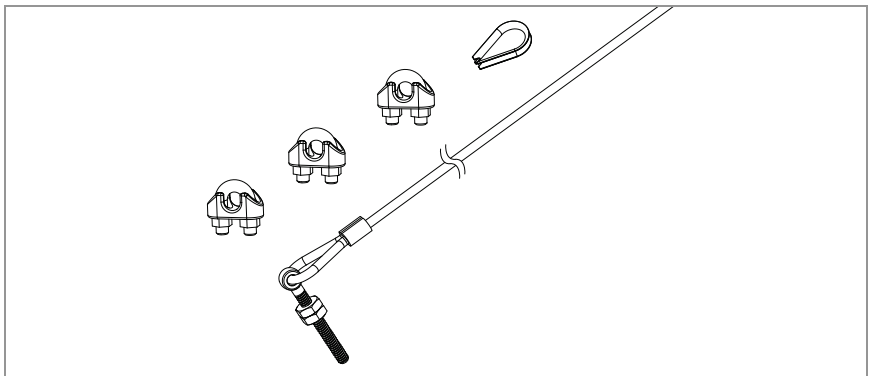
Model 6180-6 Retrieval Cable Assembly
